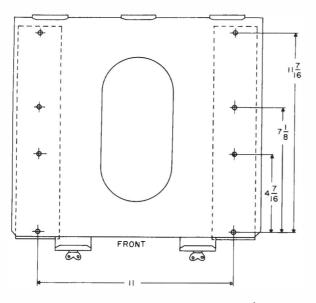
Non-Tactical Case CY-2977/UG or CY-2977A/UG, Shock Mounted Installation, Mounting Holes Location
